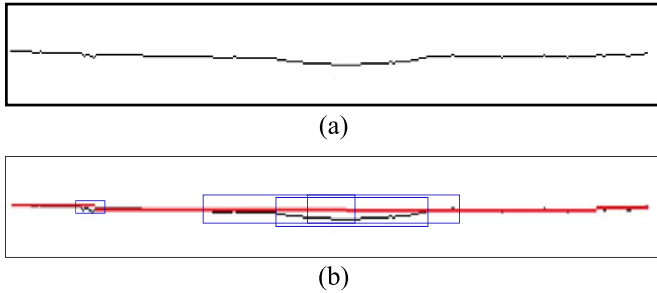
(a) Stripe skeleton after filling the gap and (b) located weld line candidates on the stripe. Red line: the base line. Blue boxes: the sliding windows for weld line candidates.
